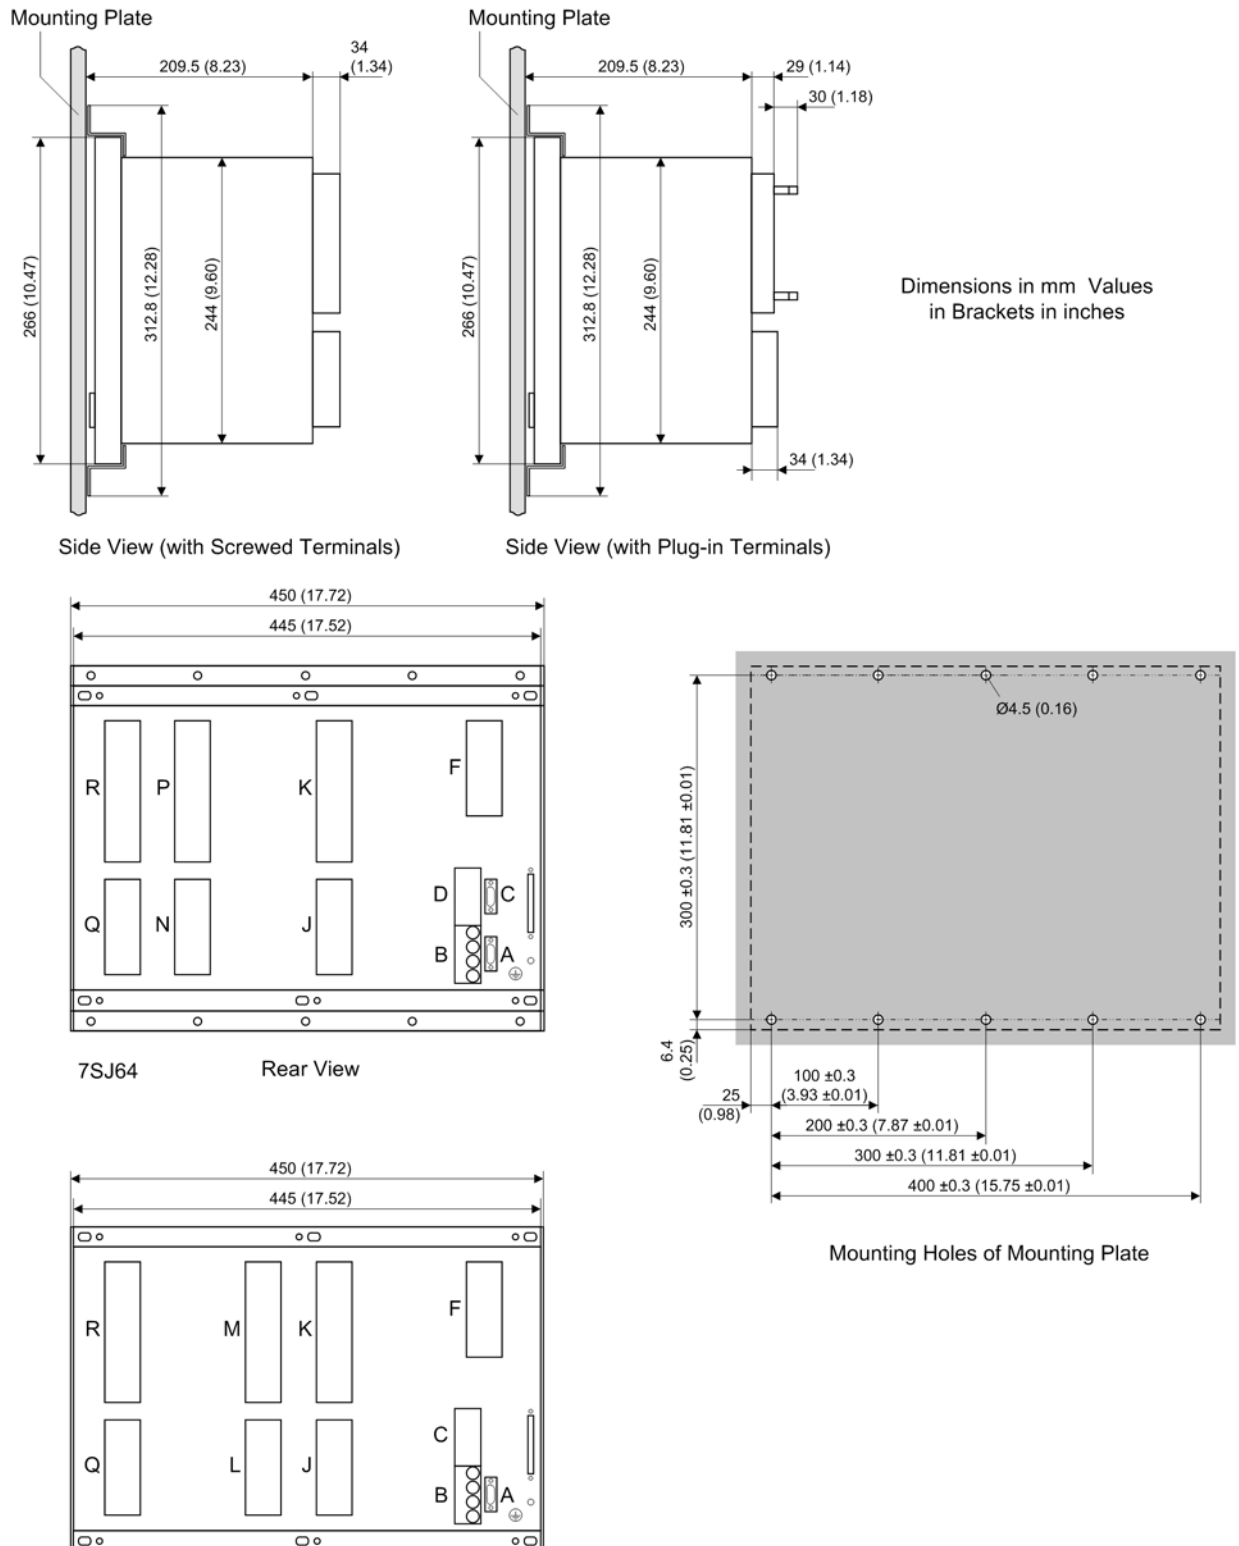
Dimensions 7SJ63 or 7SJ64 for mounting with detached operator panel or without operator panel (housing size 1/1)
